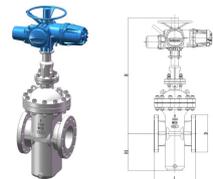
Electric Flat Gate Valve (Top-mounted Handwheel)
